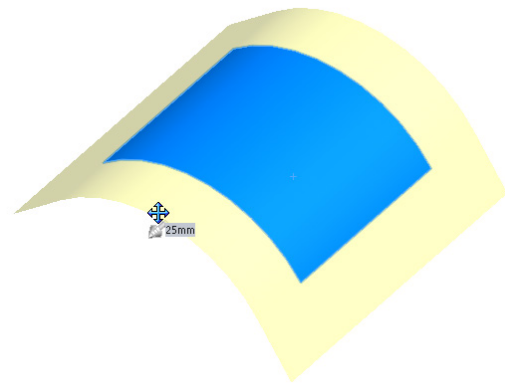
Preview of the extended surface with the Linear radio button selected
